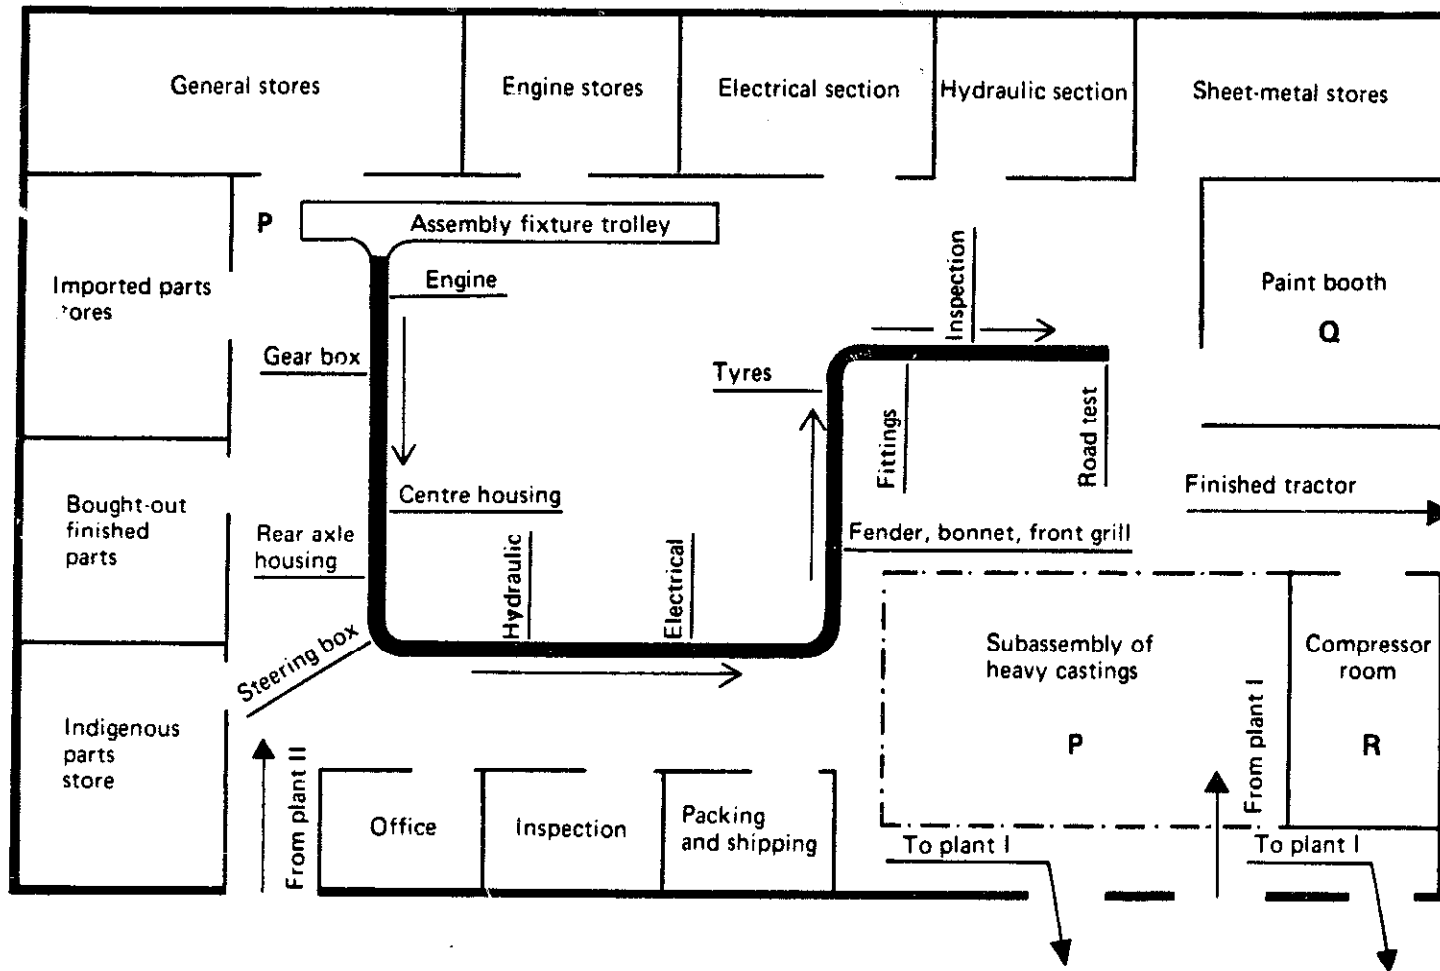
Figure XVII. Layout of tractor manufacturing plant III (stores and assembly shop)
